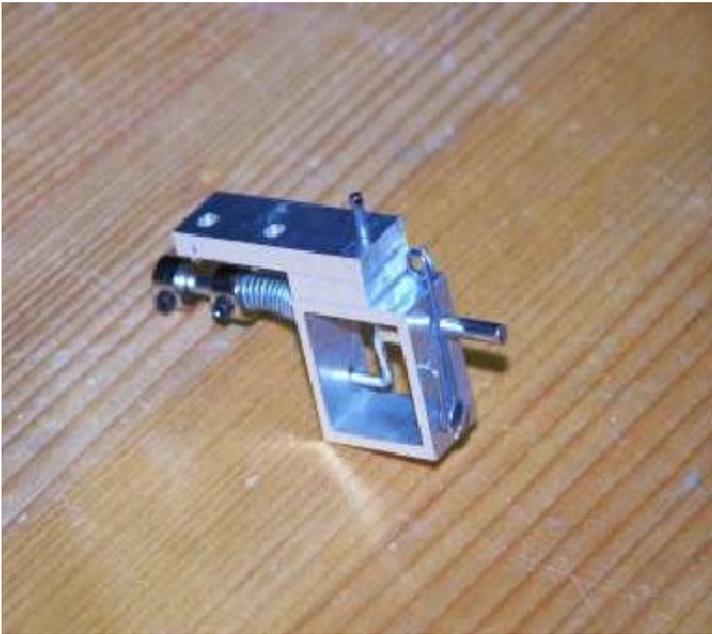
Bottom/Front isometric view of the shutoff shown in the armed, or run position. This trip wire geometry worked the best of those tried. The wire is .039" diameter (?) and is coiled 1-1/2 turns around the screw. The screw is left snug, not tight, and kept together with a 2-56 UNC locknut. The fixed end of the spring is in a loose hole through the frame. The cleanest notch can be cut in the 3/32" shaft with the smaller Dremel cutting disk. These are not fiber reinforced like the larger ones, so wear your face shield.
